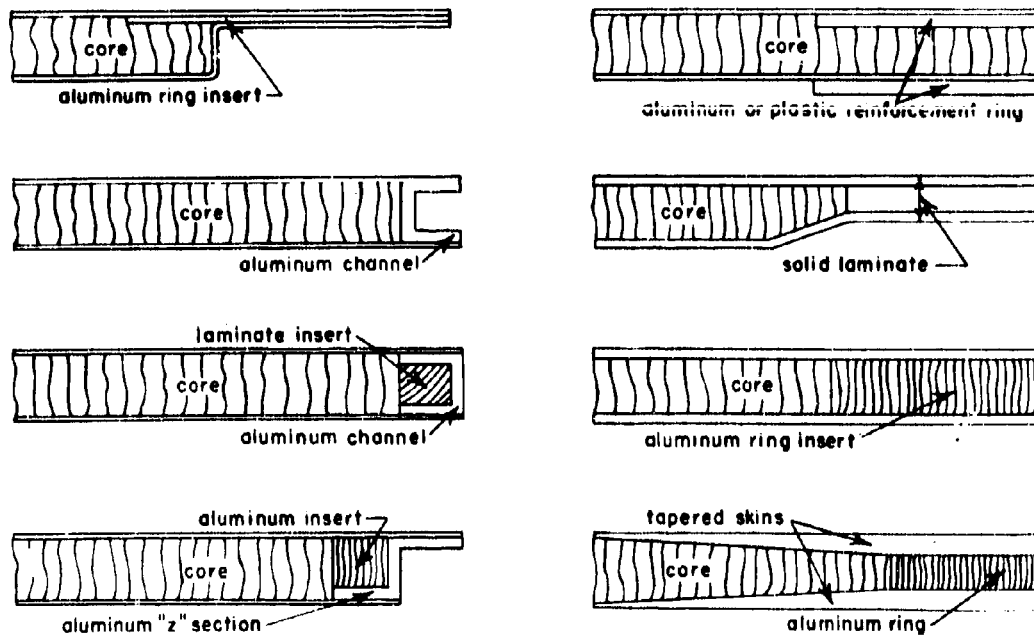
Sketches of Typical Glass-Reinforced Laminate Sandwich Radome Constructions, Showing Various Methods of Attachment
